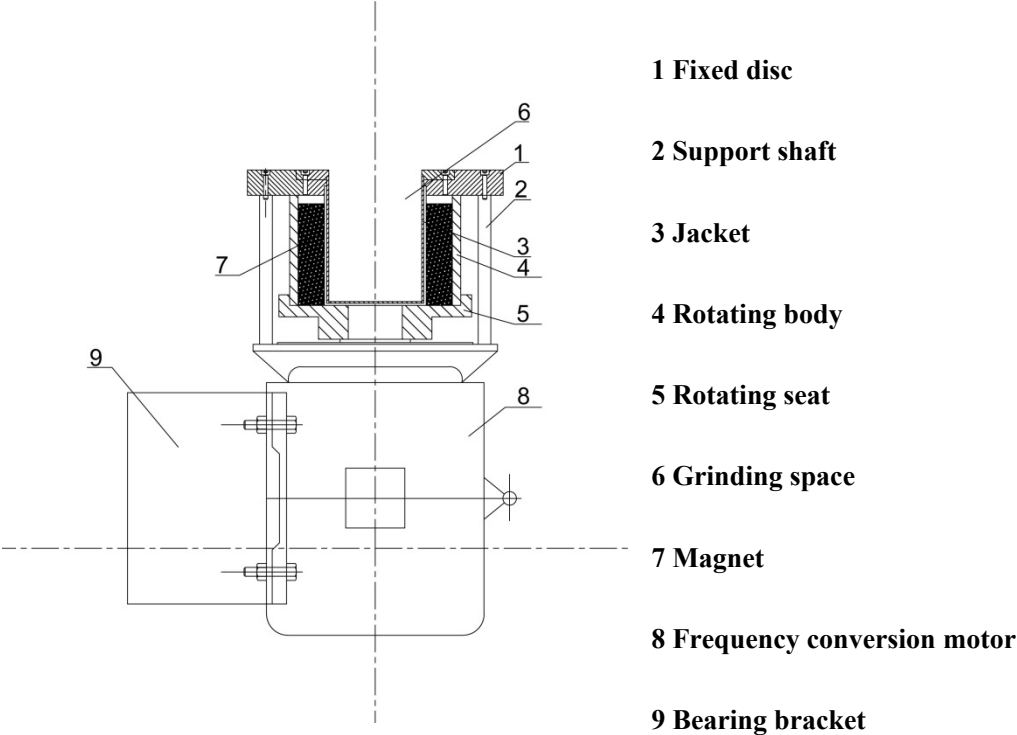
Plan view of Magnetic Ginding equipment (left blue part)
